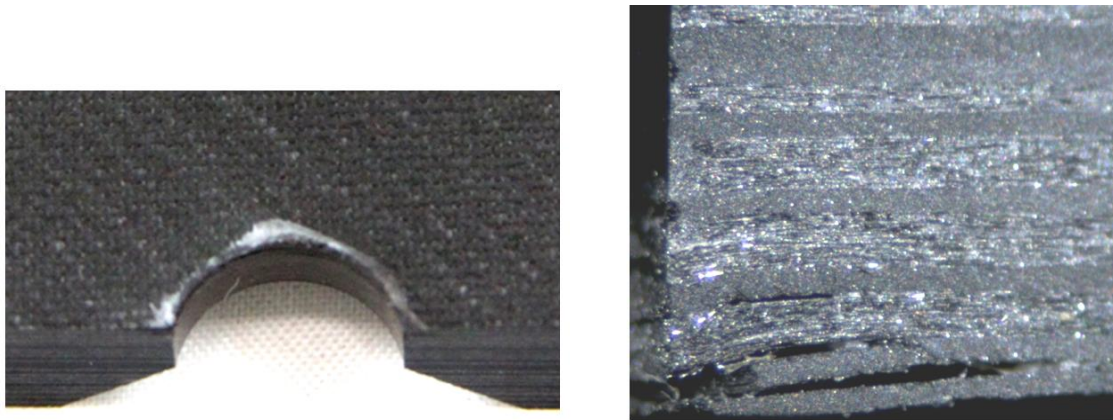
Optical microscopy of countersunk hole showing no flaws (i.e., delamination and gouges from matrix burnt-out). Drill parameters used to create this hole was used to fabricate all 9.53 mm countersunk hole for tested specimens.
